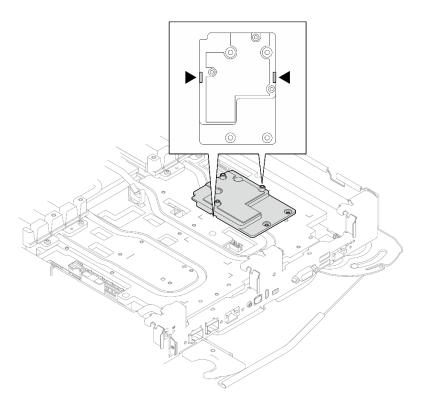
Locations of openings on the bottom side of the ConnectX-7 NDR 400 riser assembly interface plate
